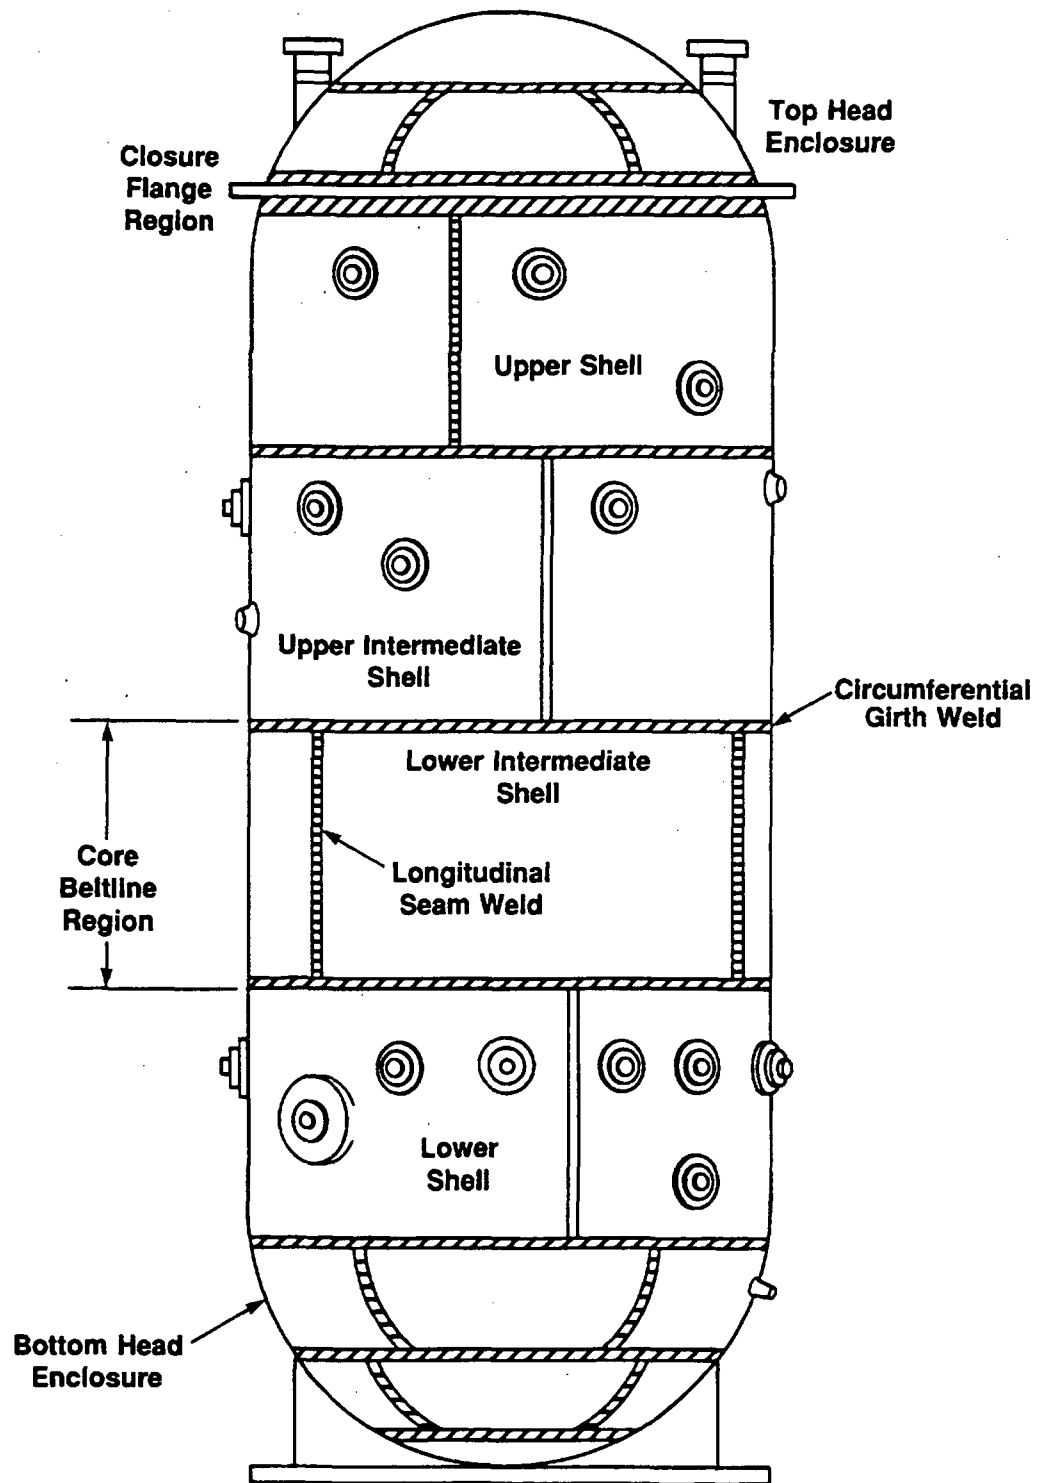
Typical Arrangement of Reactor Vessel Plates and Welds
